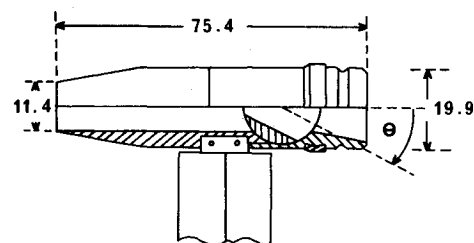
Wind-tunnel model of tubular projectile. Dimensions in millimeters.
